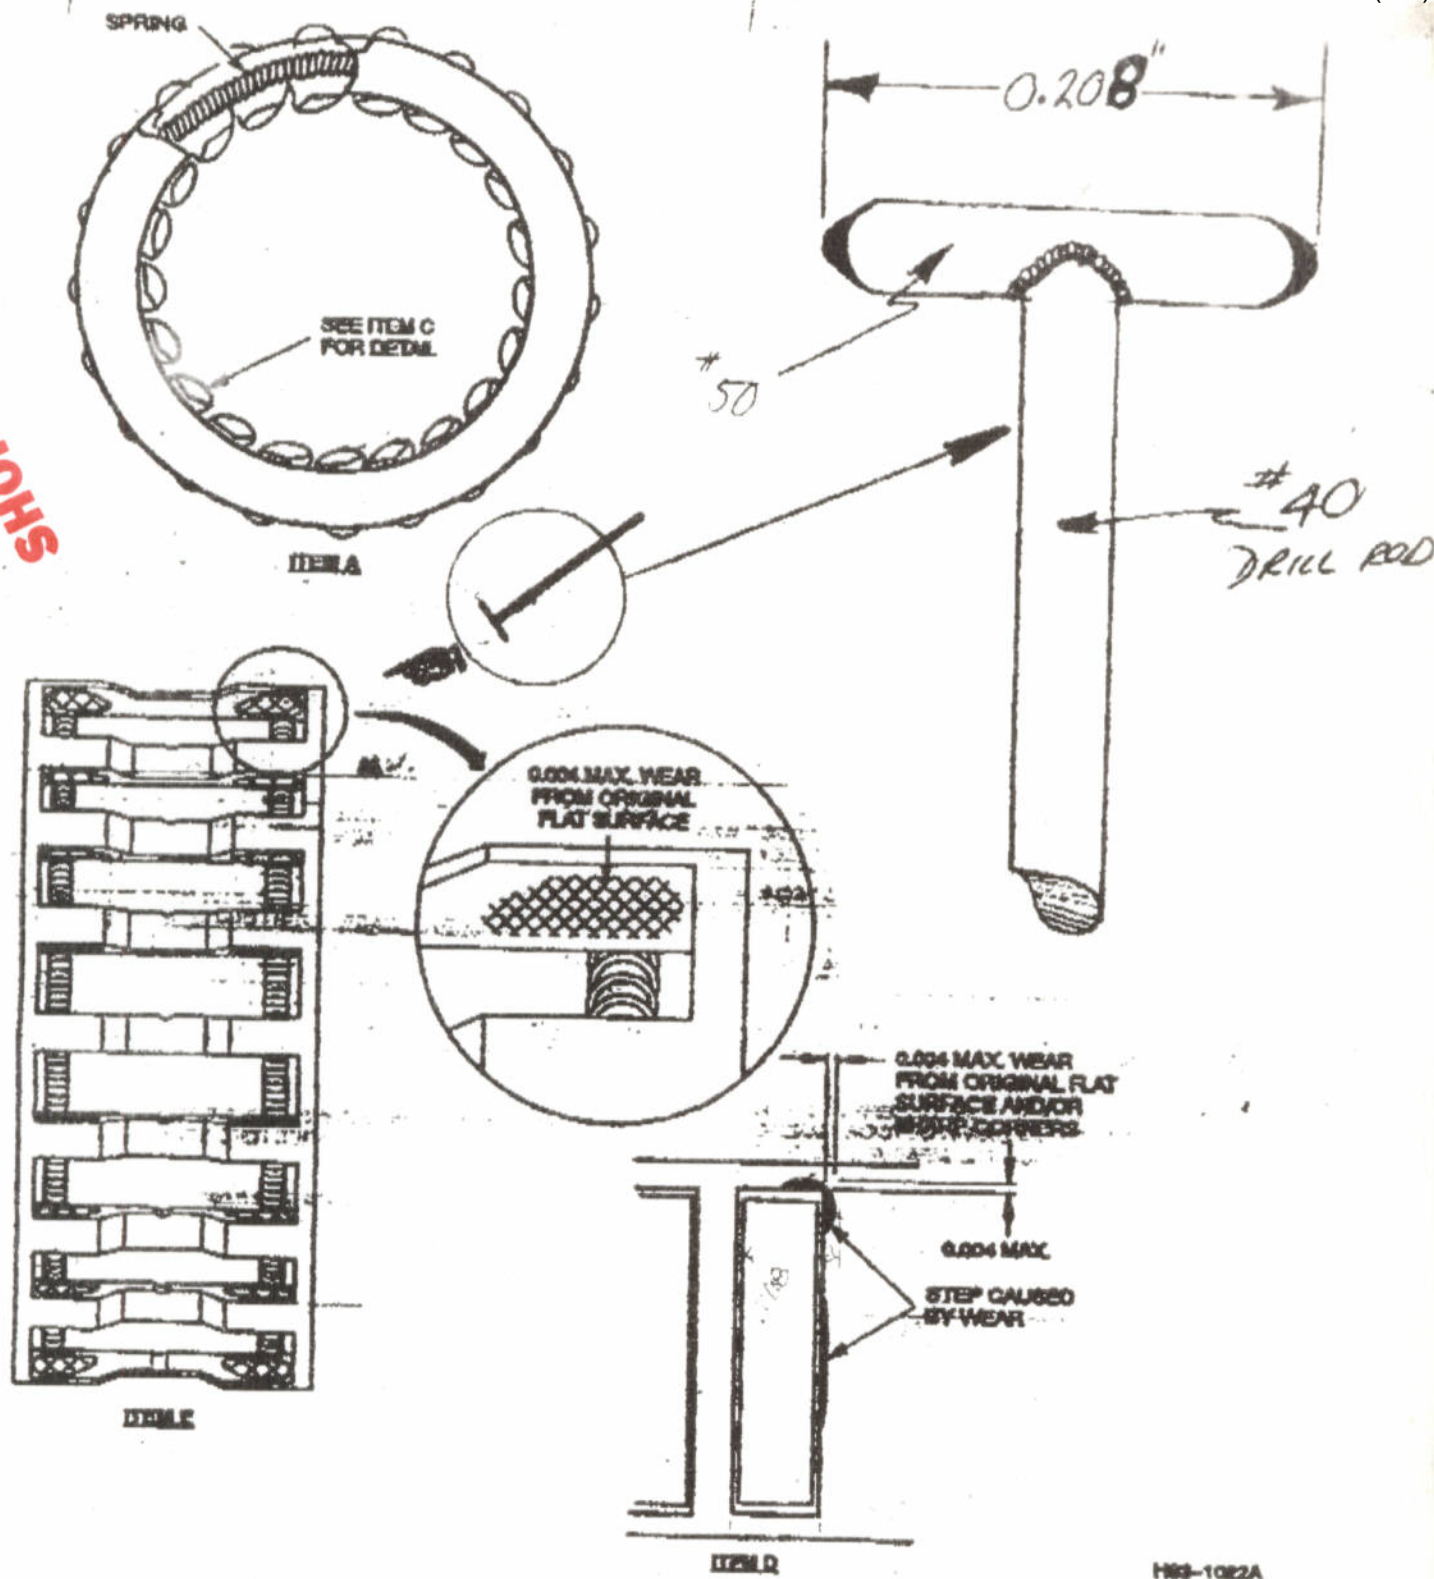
Inspection Requirements of 389D25851 Sprag Assembly
